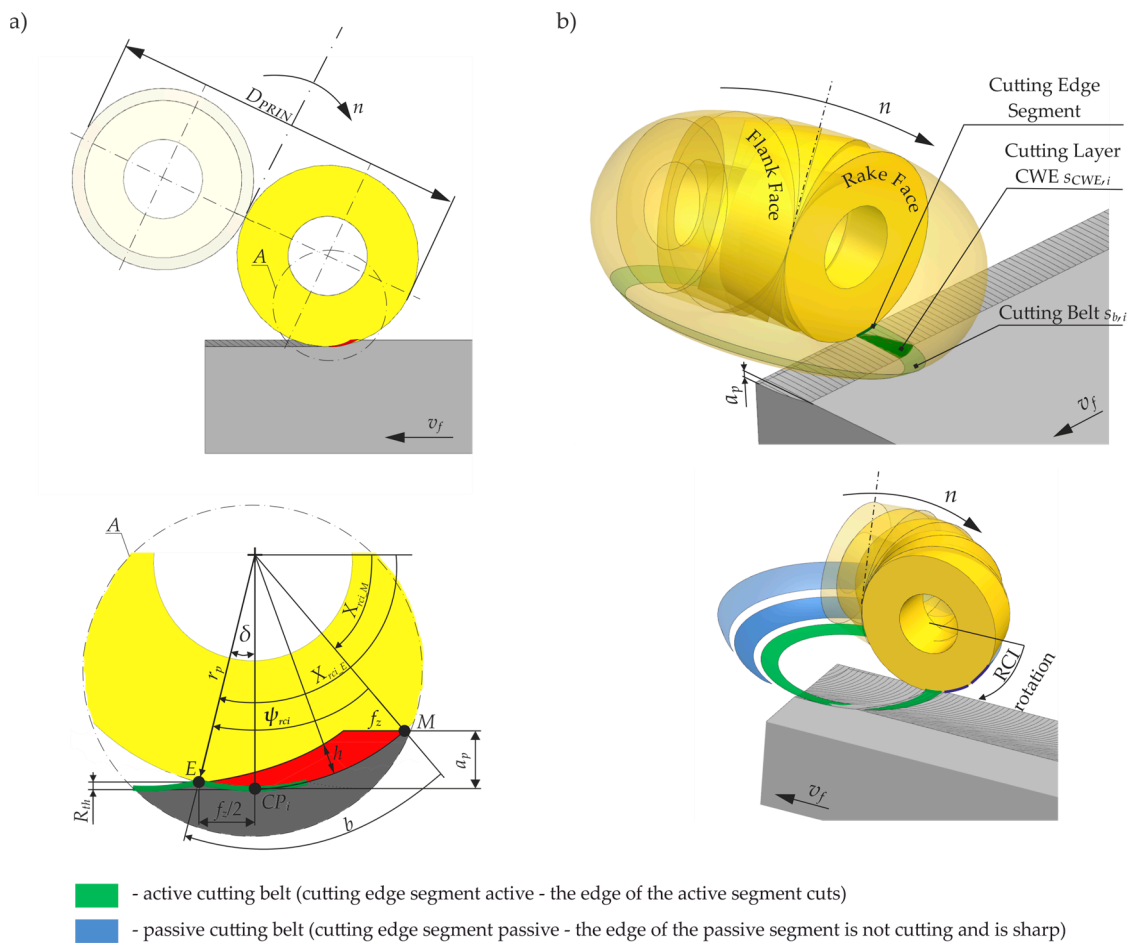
Multi-axis milling using the torus milling cutter: (a) cut layer geometry; (b) active cutting edge segment and active cutting belt.
